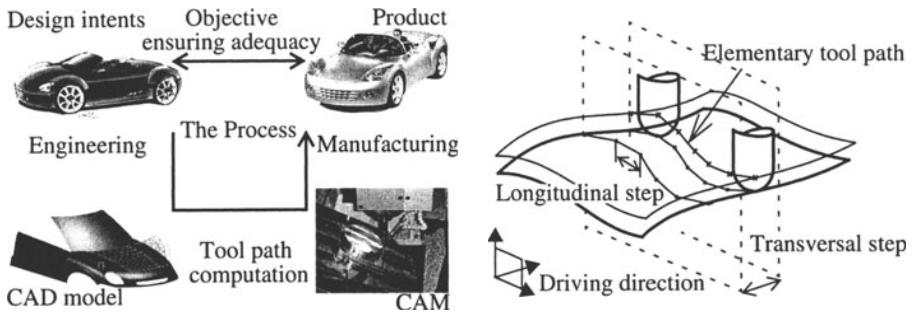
Elaboration process of free-form surfaces and tool path generation
